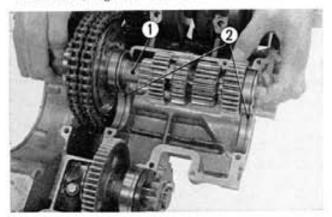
(i) Transmission mainshaft (2) Bearing set rings
